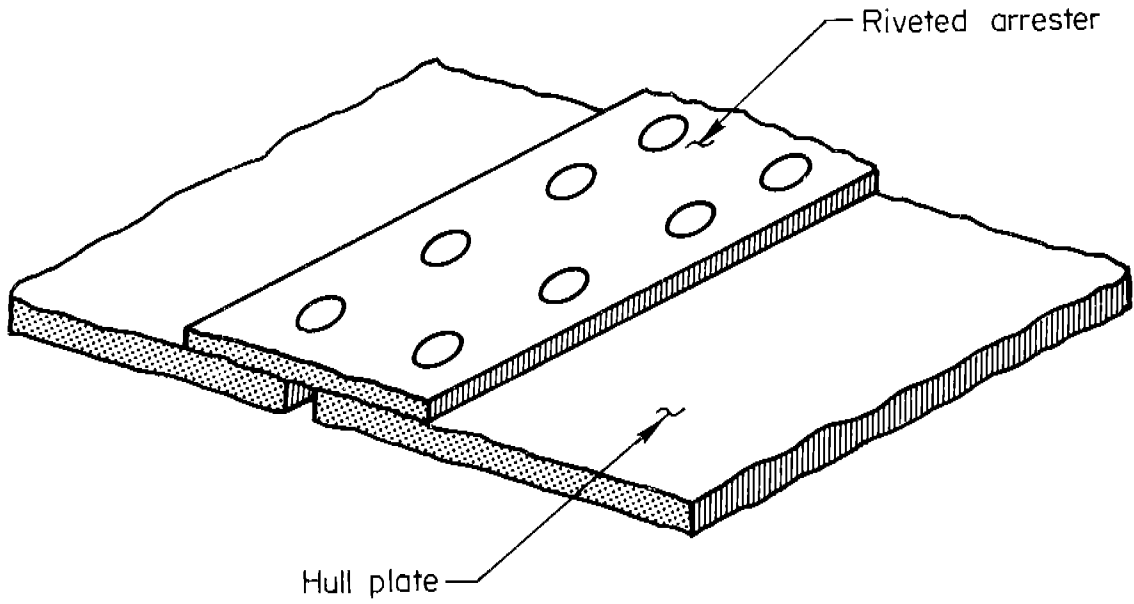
RIVETED SEAM TYPE OF CRACK ARRESTER
